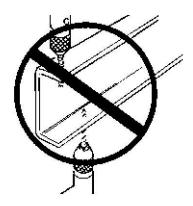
Frame Rail Flange Drilling Prohibited
